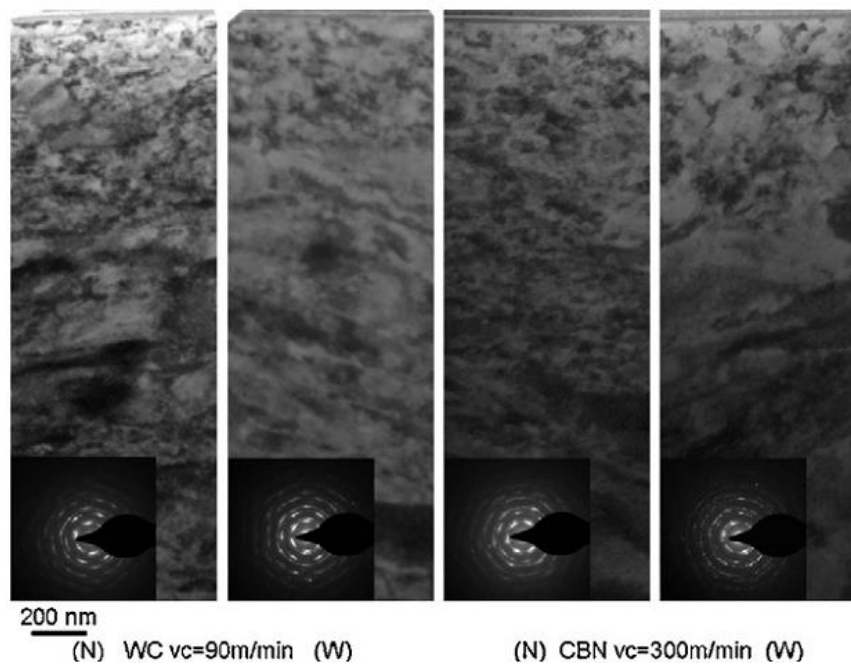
TEM images of the near surface (SPD) layers on machined samples of Inconel 718 with new and worn CBN and tungsten carbide tools [28].
